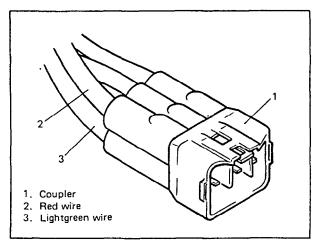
E-112 Connecting ISC Solenoid Valve Wires
